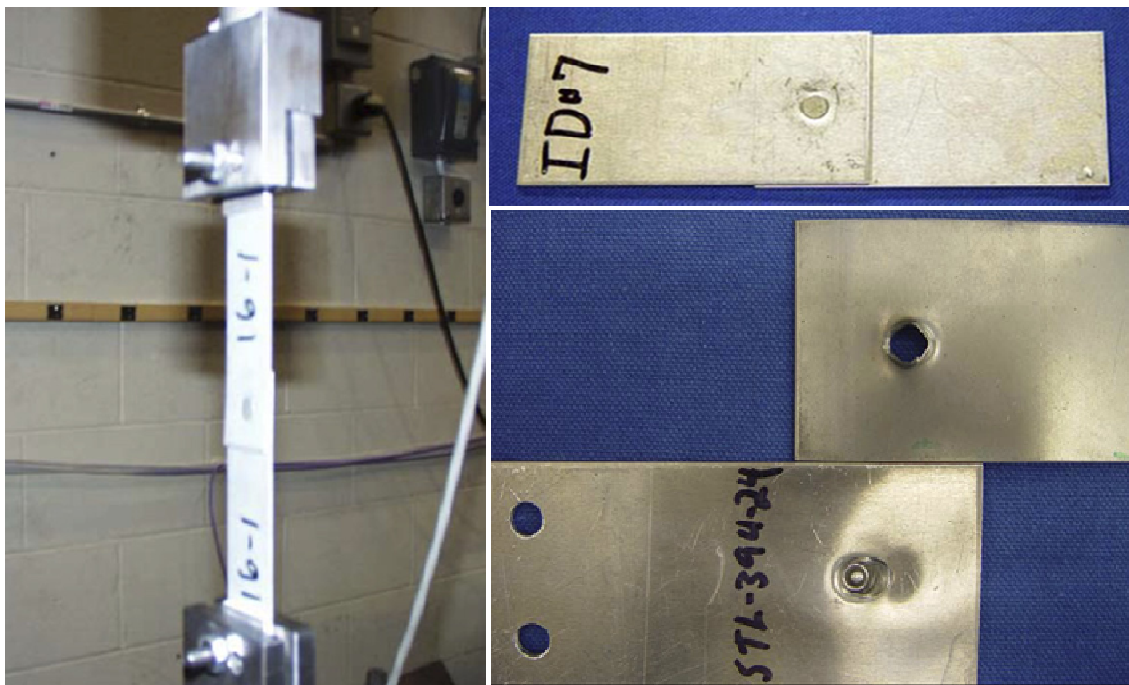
Shear test step-up showing specimen with a spot weld and spot weld failure [14].
